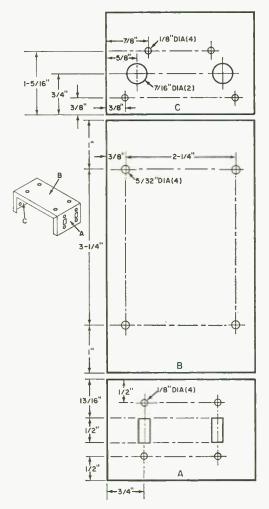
All components will fit in aluminum metal box. Author used Premier aluminum box AMC-1006.
